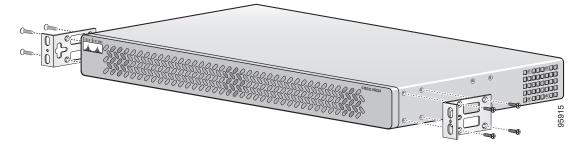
19-Inch Rack-Mounting with Rear Panel Forward
